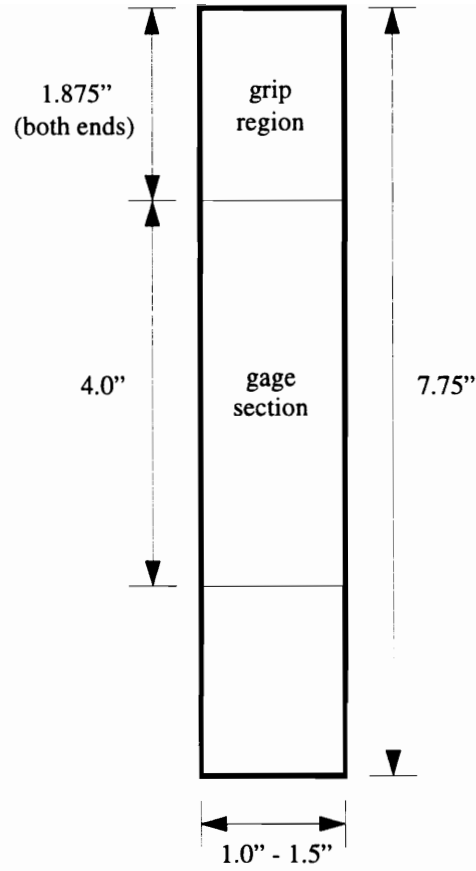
Tension-Tension Fatigue Specimen Dimensions
